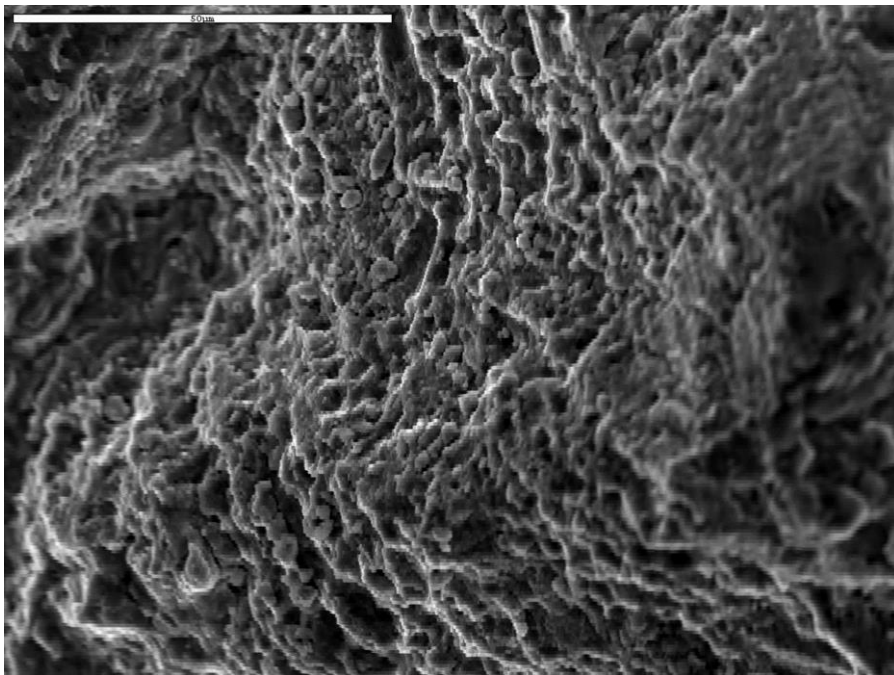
SEM fractography indicating the ductile fracture for the remaining parts of A356 alloy rotating bending specimen.
